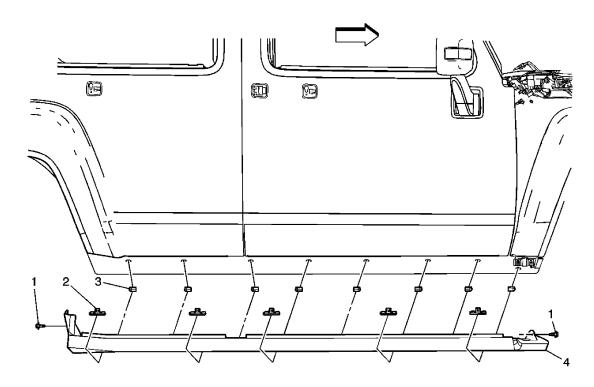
Molding Replacement - Rocker Panel Courtesy of GENERAL MOTORS CORP.
